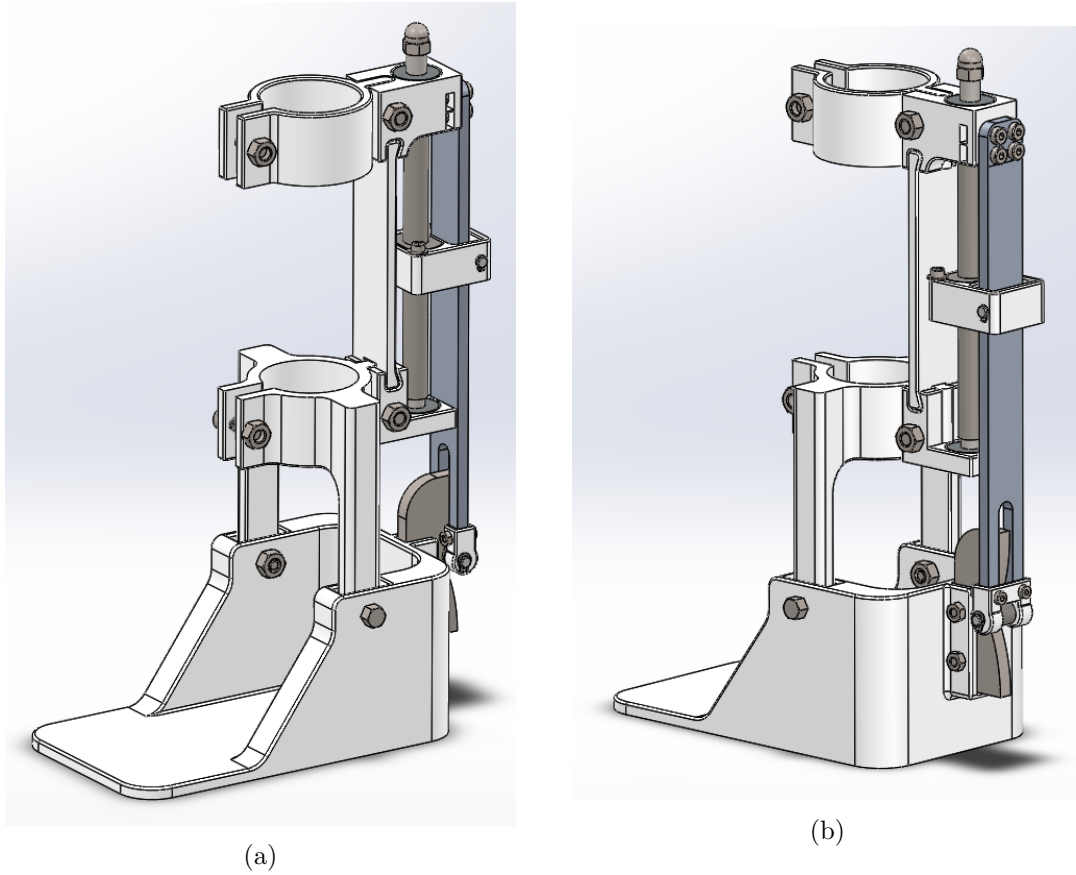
(a) A front trimetric view of the final AFO simulator design in SolidWorks and (b) a back trimetric view of the final AFO simulator design in SolidWorks.
